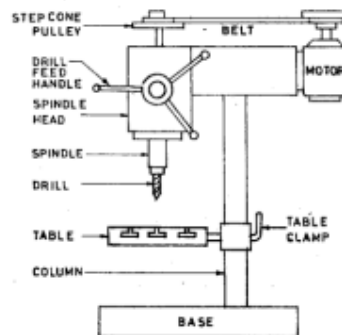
Illustrates the Working Model and Parts of the Drilling Machine [17].
